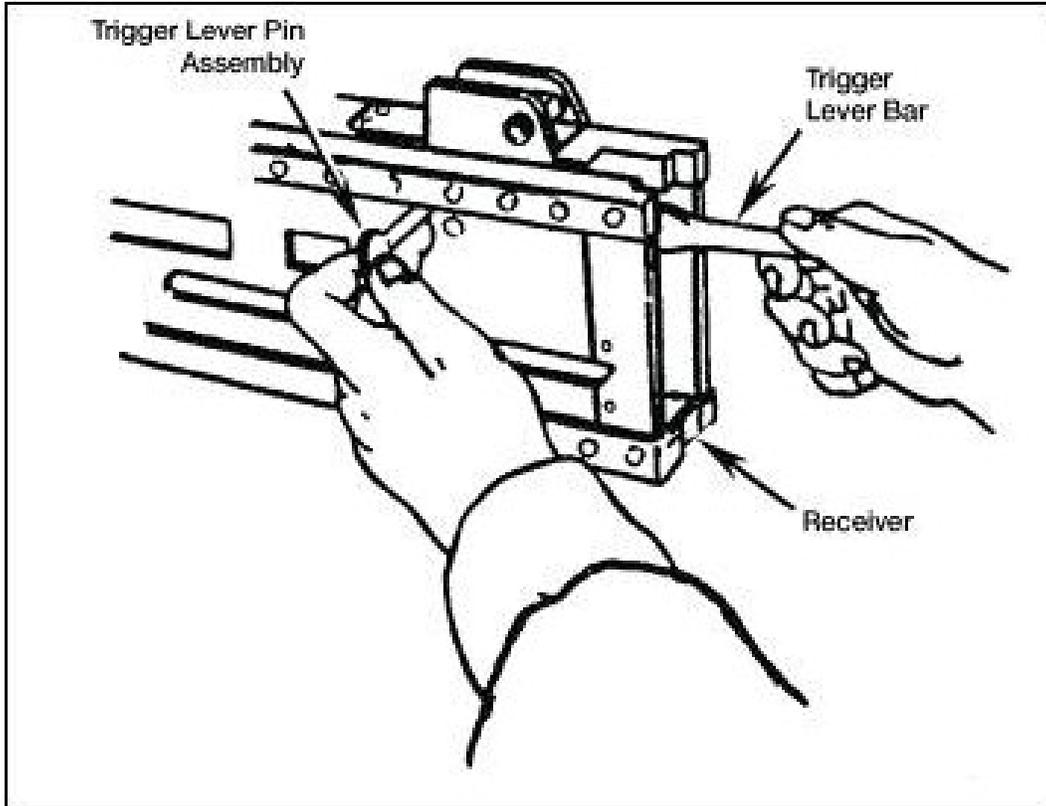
ST-1025_23 (Assembly of the trigger lever)
